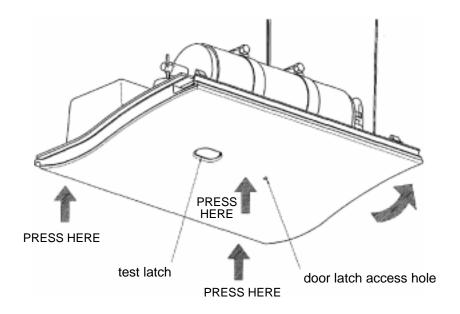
Closing the Door on the Left Hand Passenger Mask Assembly
